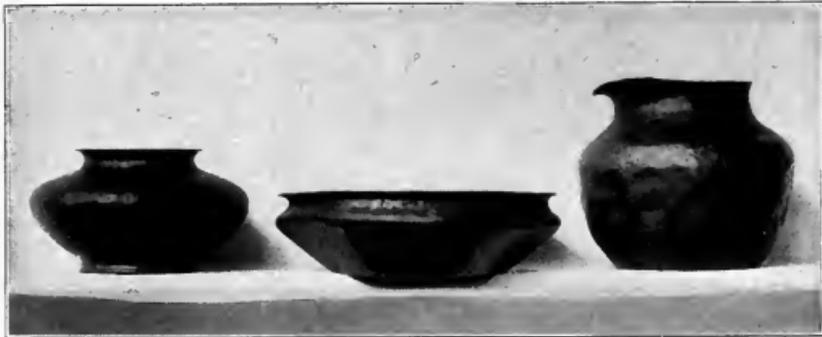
Tea-pot body, jardiniere, pitcher, roughly raised to shape, ready for the handle and spout to be soldered on.
